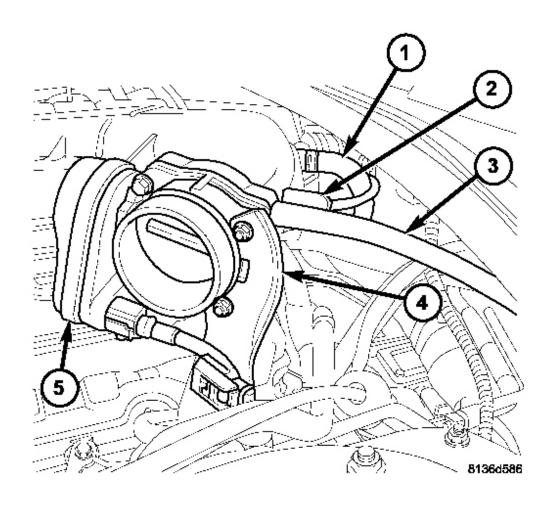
Locating Manifold Absolute Pressure Sensor Courtesy of CHRYSLER LLC
